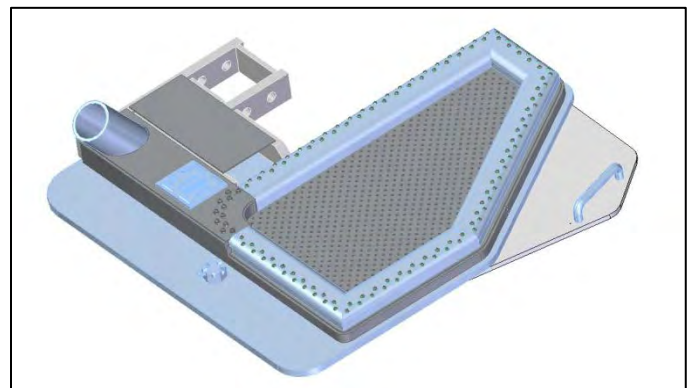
Roof bolter canopy with the canopy air curtain plenum built in.
